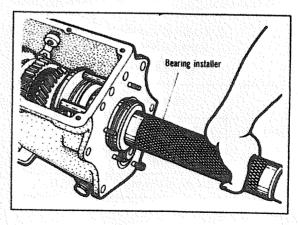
Assembling of Main Drive Gear and Mainshaft (1)
